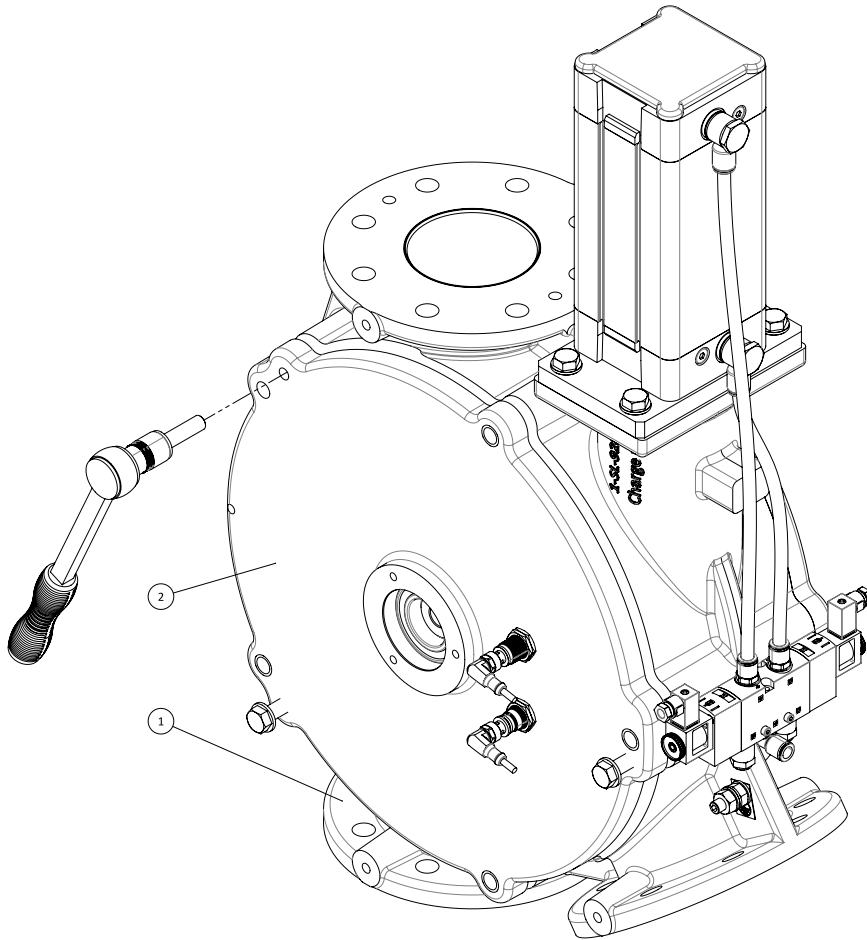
End cover bolts removed (to be used as push off bolts) (PTD)
